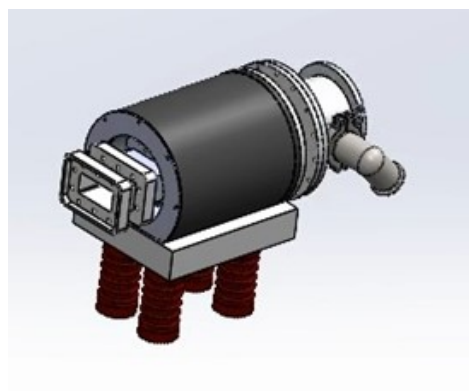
The technical drawing for the PM-MDIS design in assembled view.
